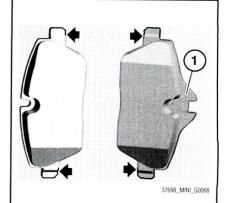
Brake pad with indentation is intended for accommodating the brake pad wear sensor and must be fitted on the piston side
